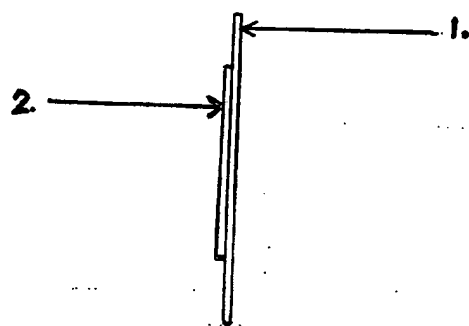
FIGURE A-I (CROSS) (SECTIONAL VIEW)/ END ON VIEW
